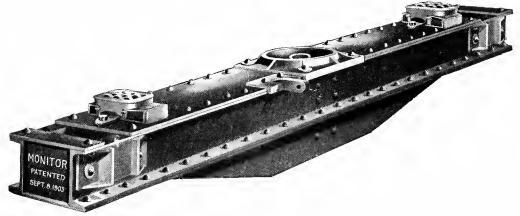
Monitor Truck Bolster with Creco Roller Side Bearings for Freight Cars. Chicago Railway Equipment Company.
